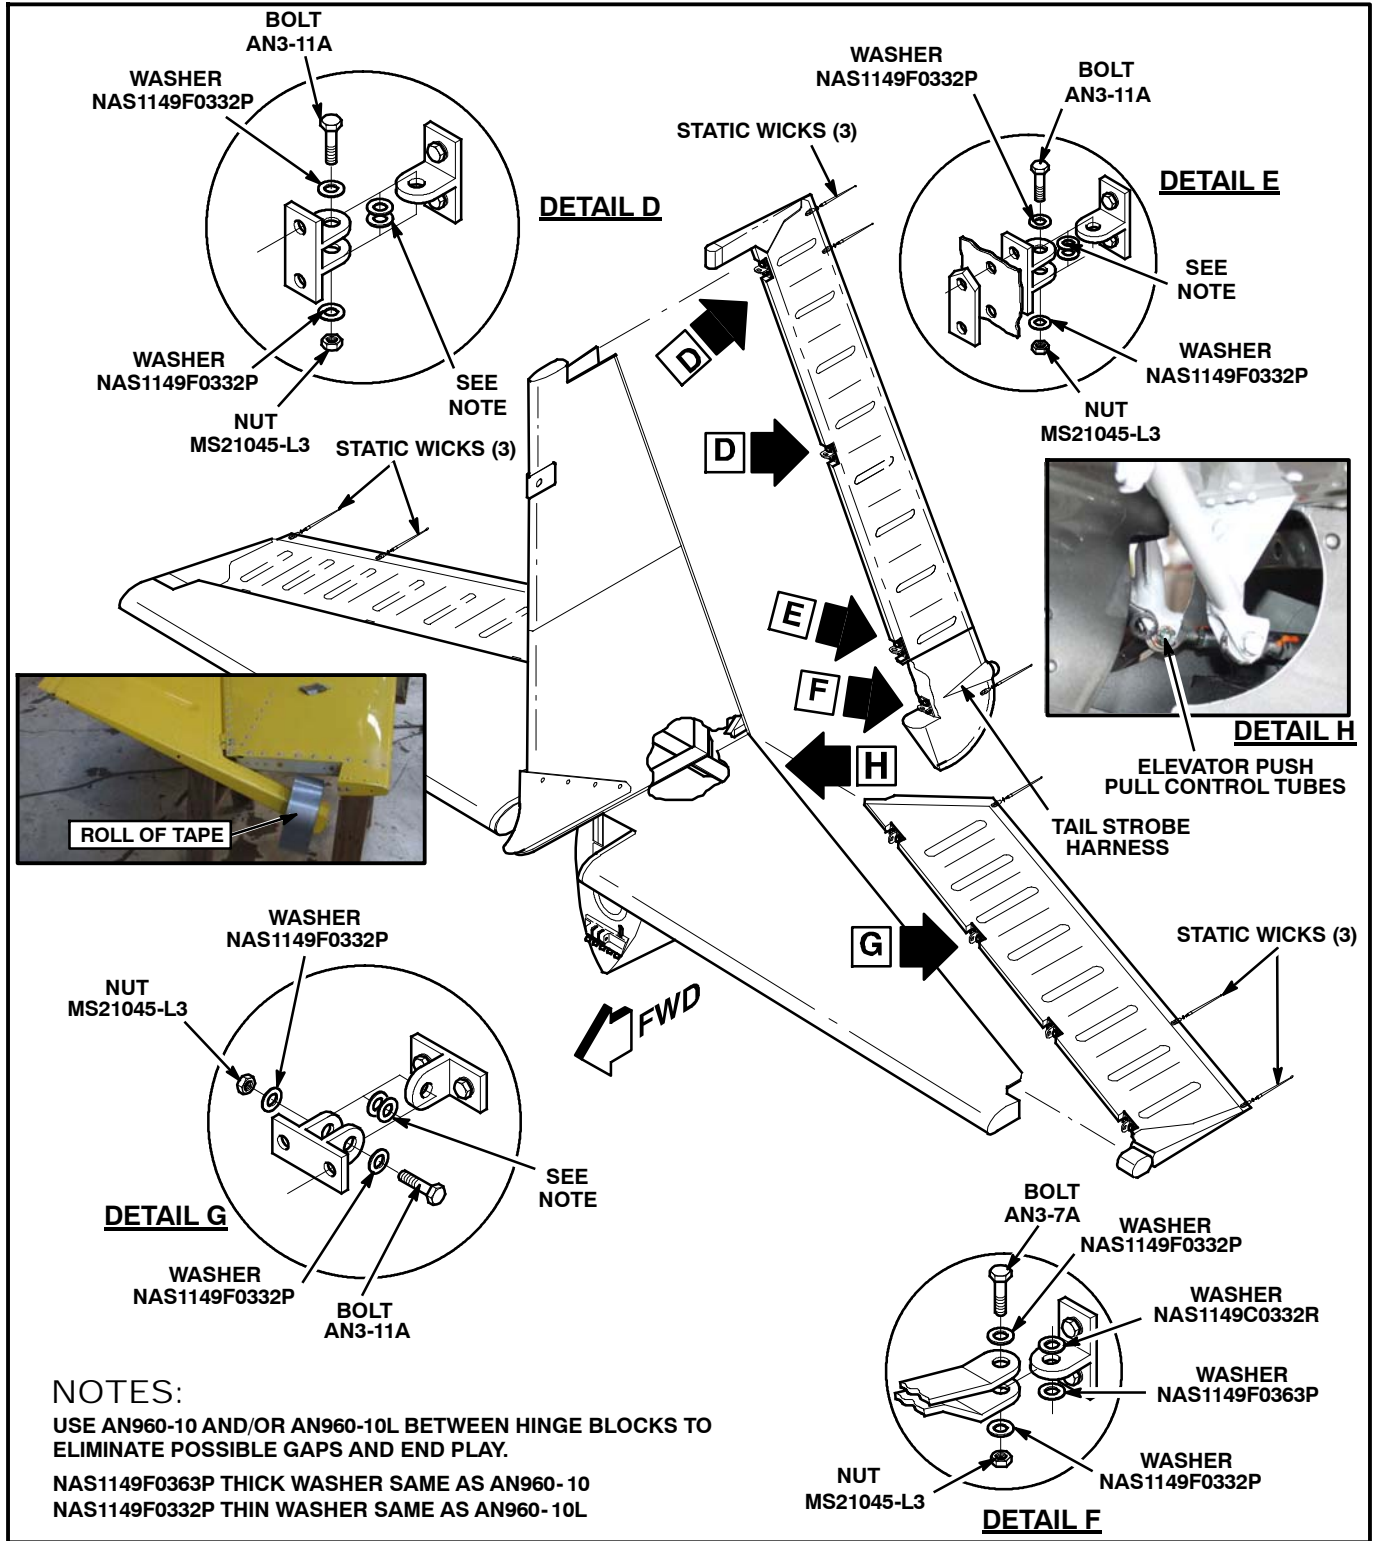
RUDDER AND ELEVATOR INSTALLATION
